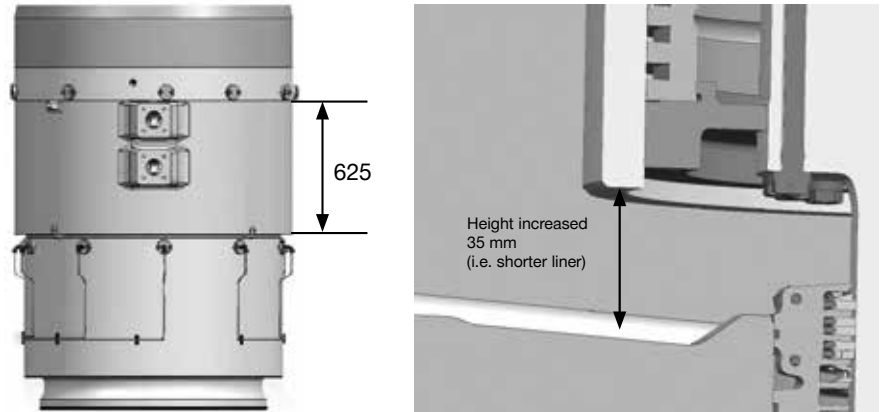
Left: cylinder liner cooling jacket height; Right: clearance between liner and scavenge bottom
